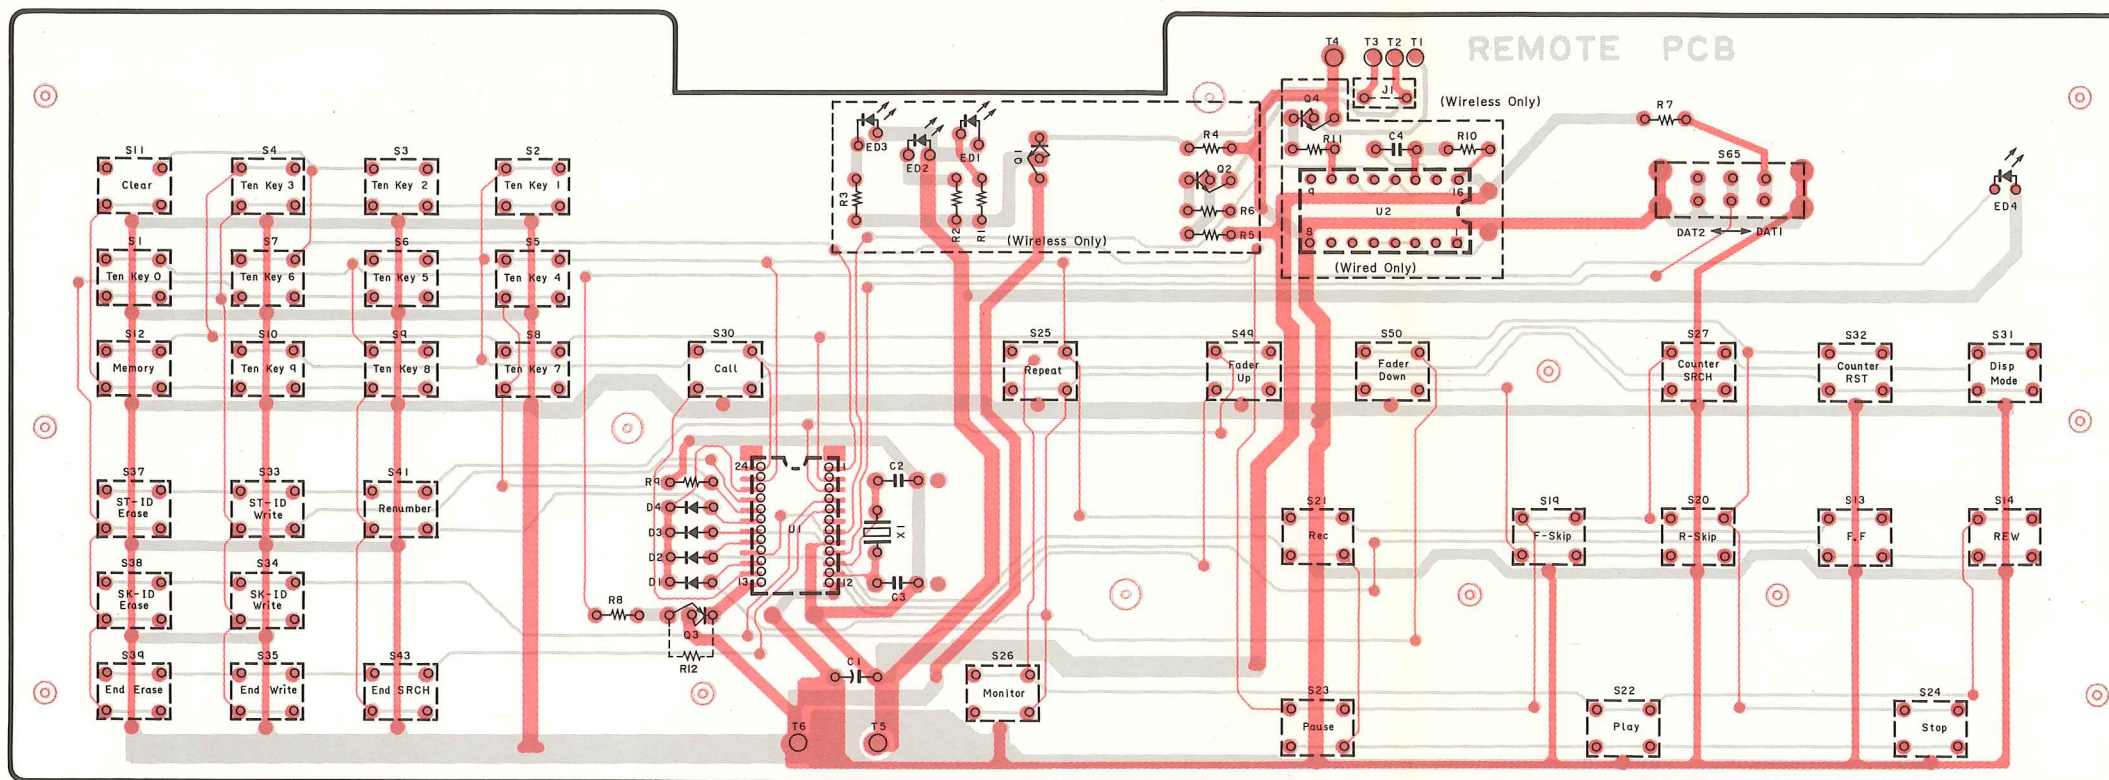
Remote P.C.B. Ass'y (N-1000R)
